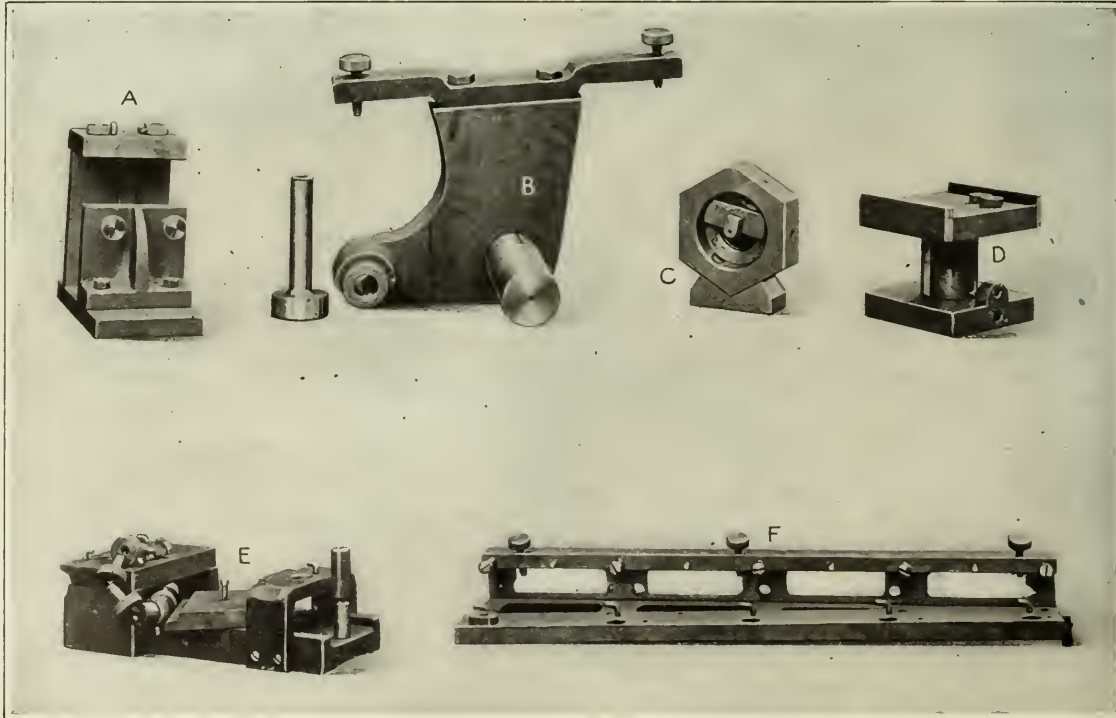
A, Drill Jig for Cross-slide; B, Drill Jig for Index Lever Bearing on Bed; C, Drill Jig for Adjusting Nut for Spindle Rear Bearing; D, Drill Jig for Lock Bolt Cam; E, Drill Jig for Chuck Operating Slide and Shoe; F, Drill Jig for Cylinder Carriage Gib
